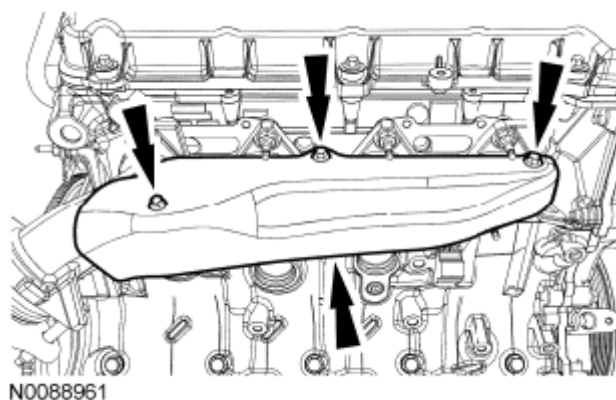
Locating RH Exhaust Manifold Heat Shield And Bolts
